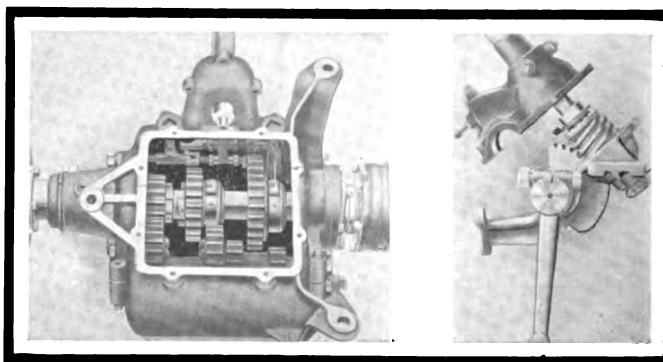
The Cadillac 3-speed, selective, sliding gearset, showing suspension points
